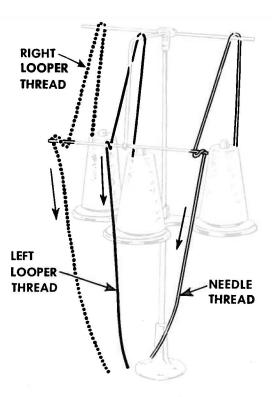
Unwinder 151031 Threaded for Three-Thread Stitch
